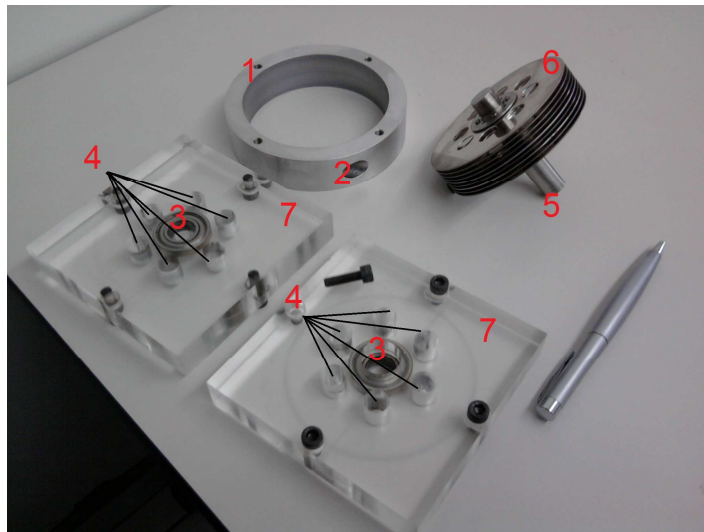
First Tesla turbine disassembled: 1- casing, 2- fluid inlet, 3- bearings, 4- fluid outlet, 5- shaft, 6- discs and 7- lateral case.
